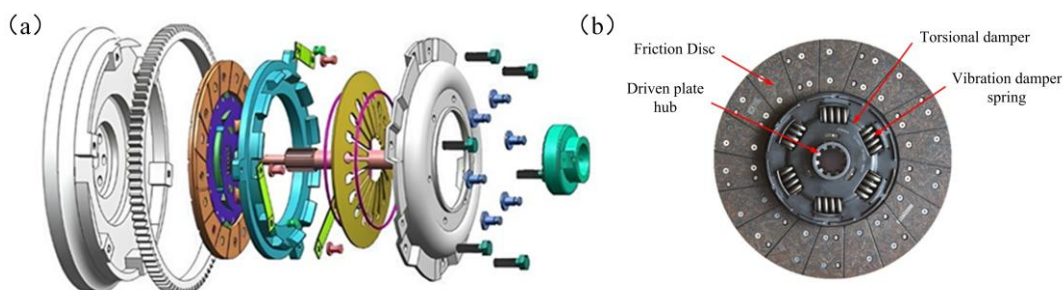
(a) Clutch Assembly; (b) Driven Plate Assembly.
